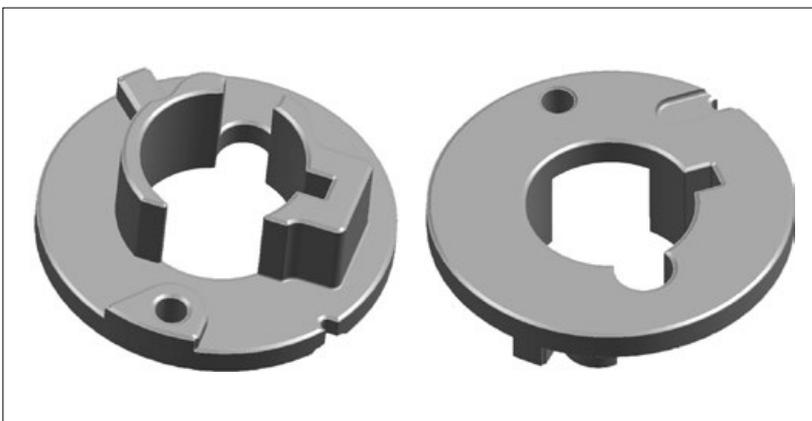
GKN Sinter Metals Pvt. Ltd received the Best PM Part 2015 award for their base plate component used in a motorcycle engine camshaft assembly
